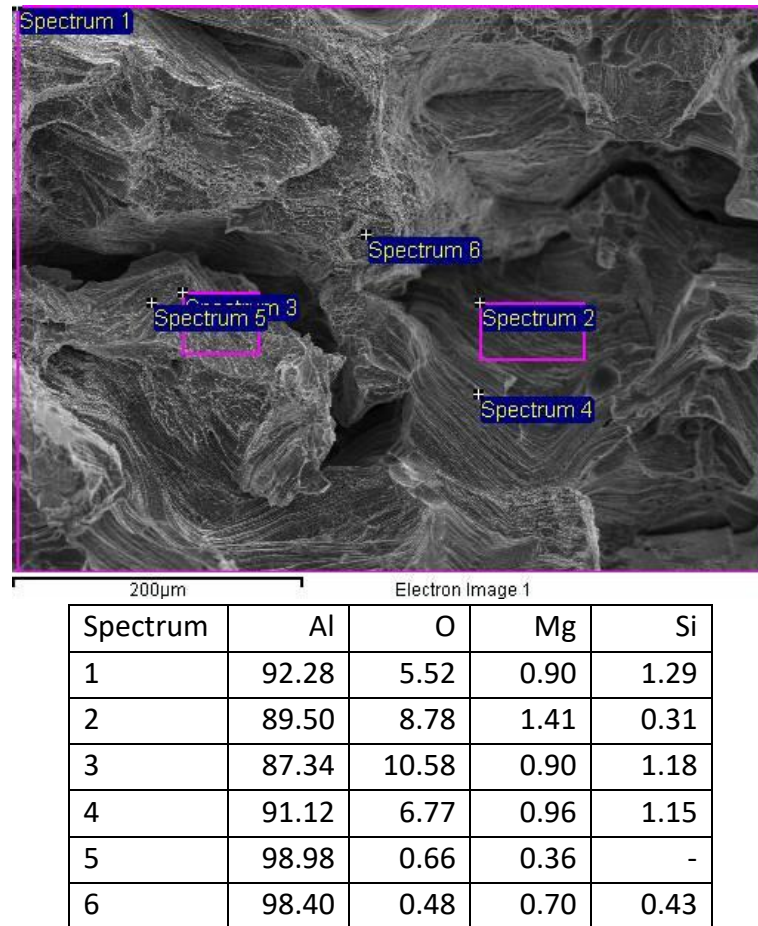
EDX measurements (wt%) of fracture surface of SLM AA6061 sample 14 from test A3.
